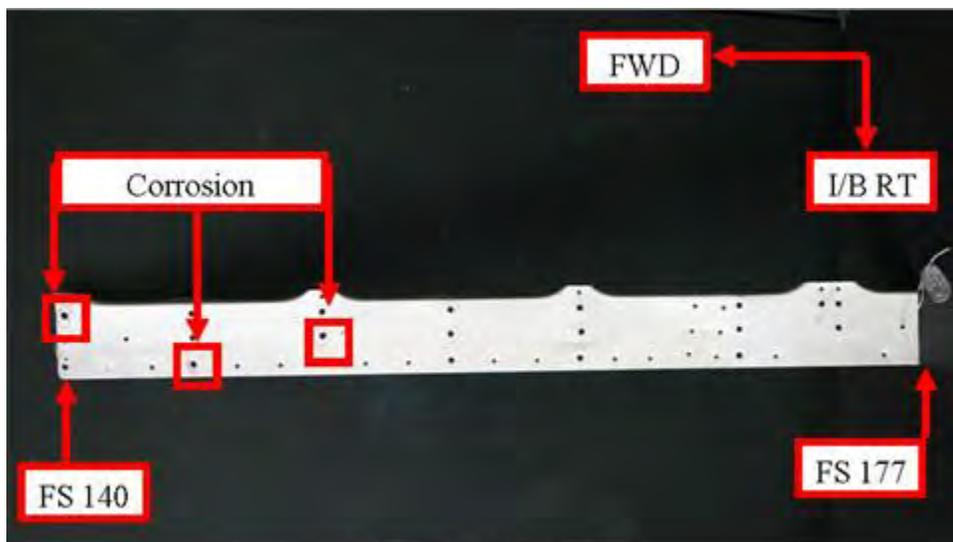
Macroscopic View of Severe Corrosion on the Right Center Body Bulkhead FS 140
